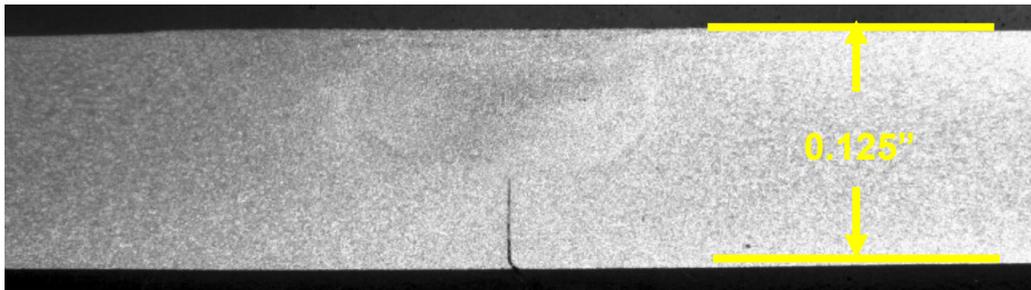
Macrostructure of single pass butt weld AL5456-H111 - 0.125
